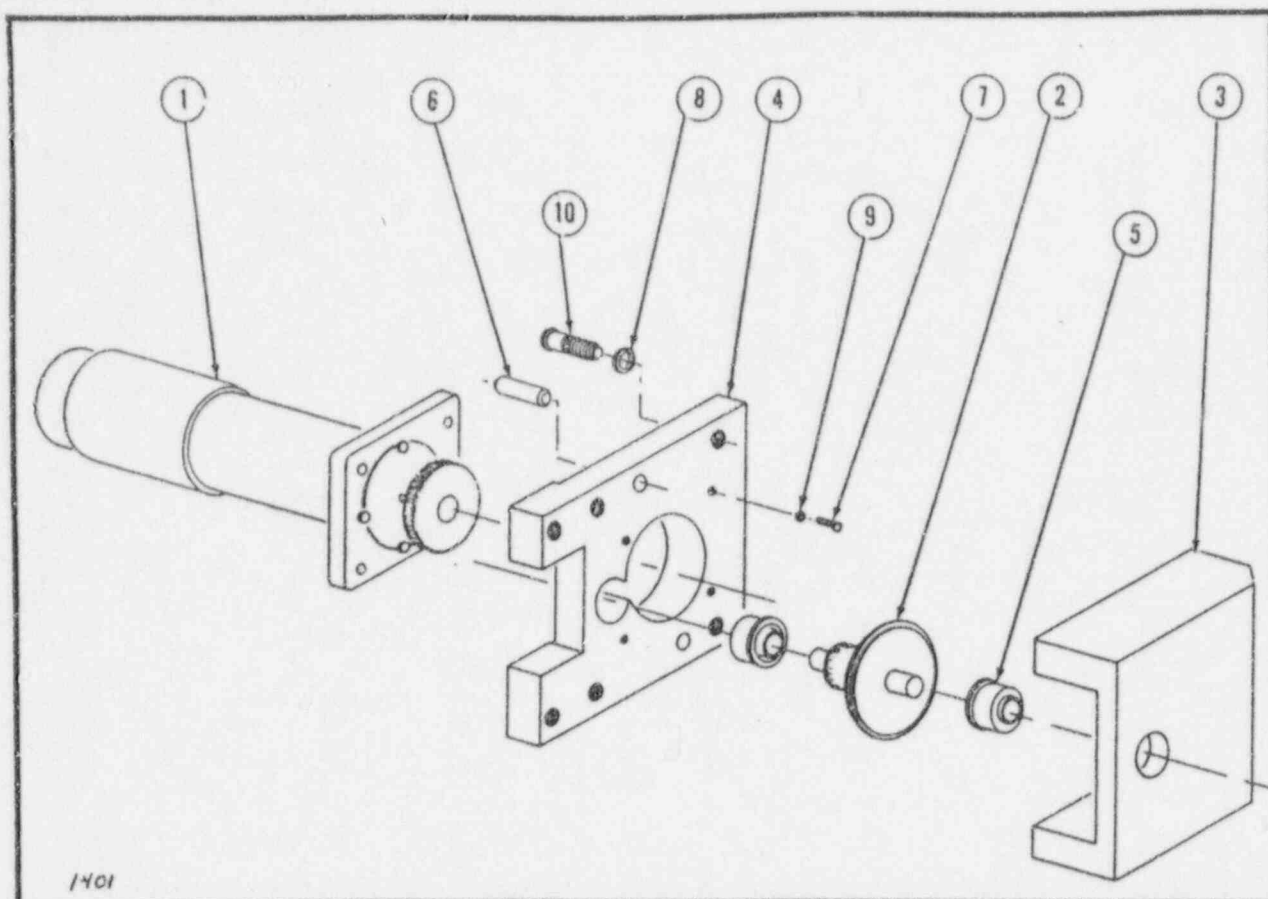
MOTOR MOUNT ASSEMBLY - Part No. 182095
